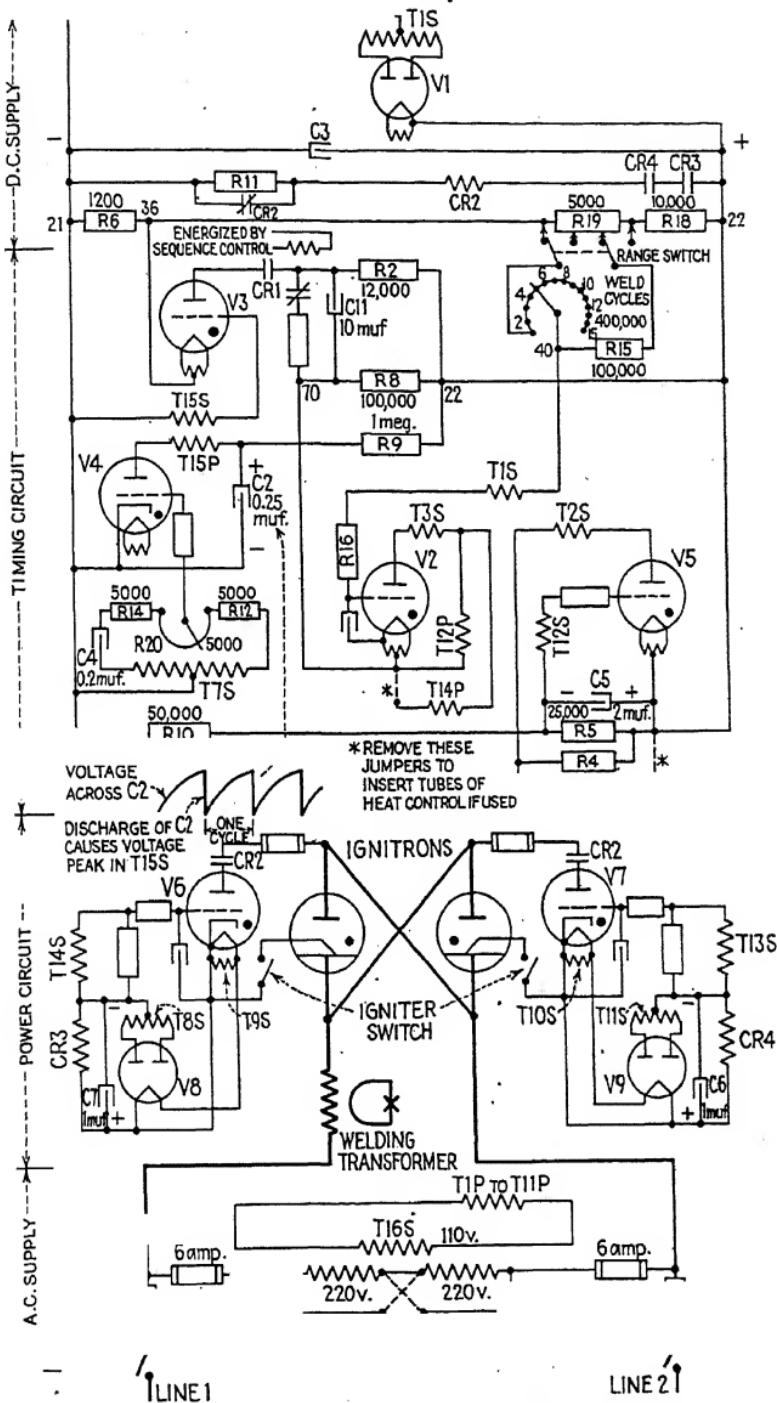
G.—Weltronic synchronous spot-welding control (Model 51).
